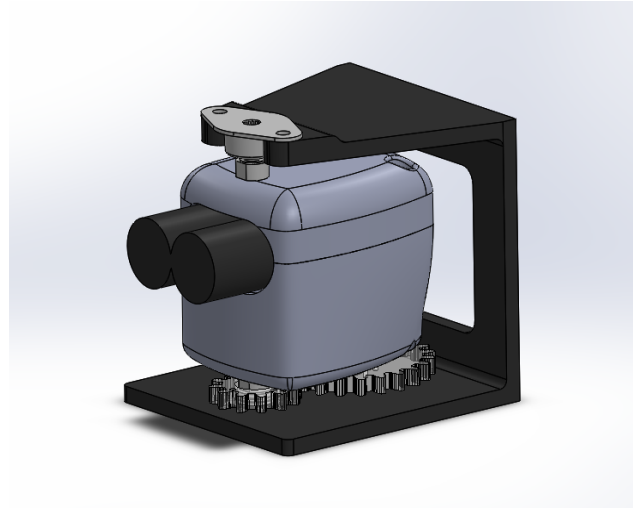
A 3D view of the external mechanical design of the Laser Rangefinder. This design was used for 3D printing.
